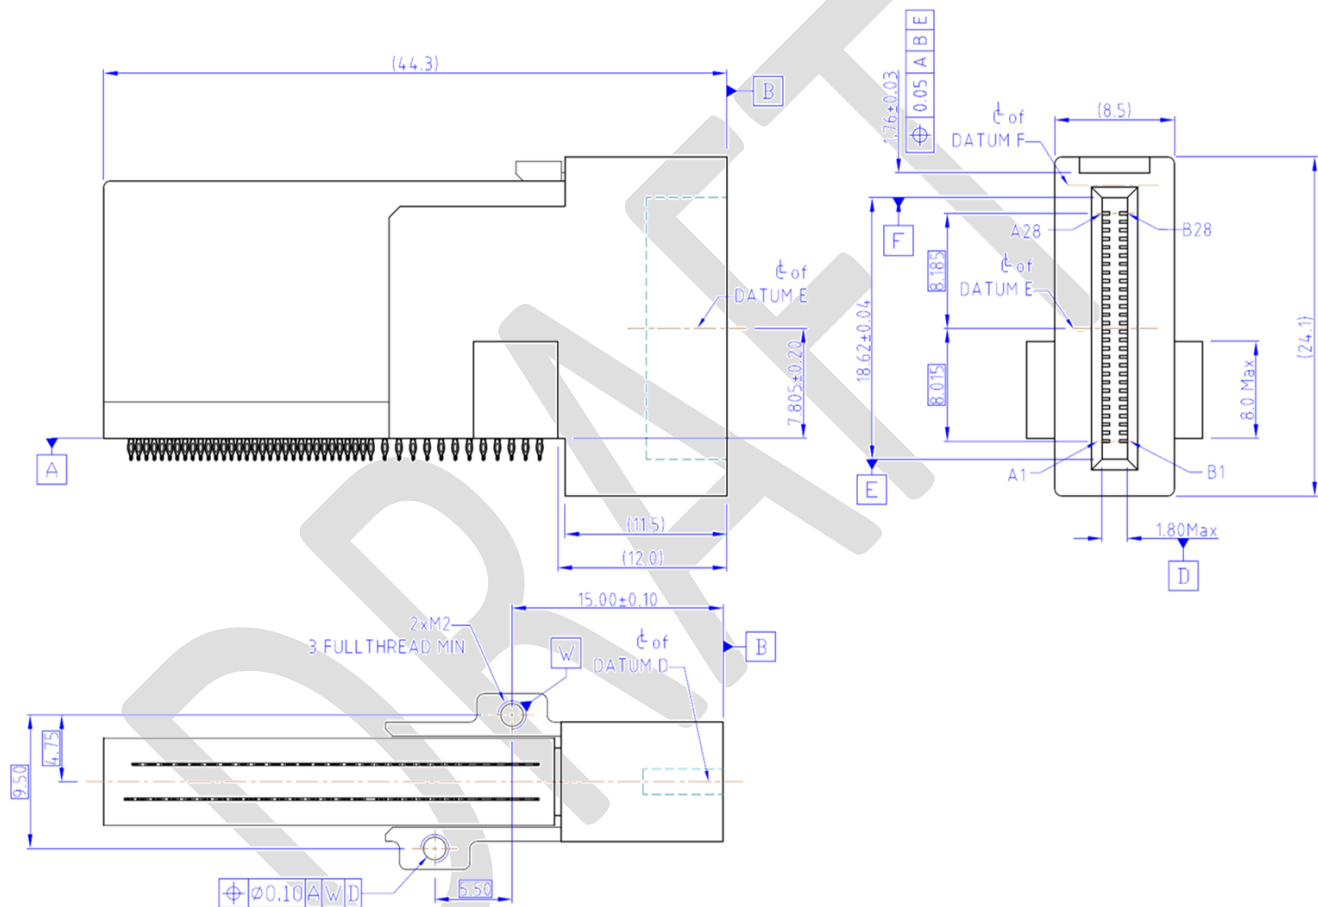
1C RIGHT ANGLE ORTHOGONAL CONNECTOR DIMENSIONS (MM)
